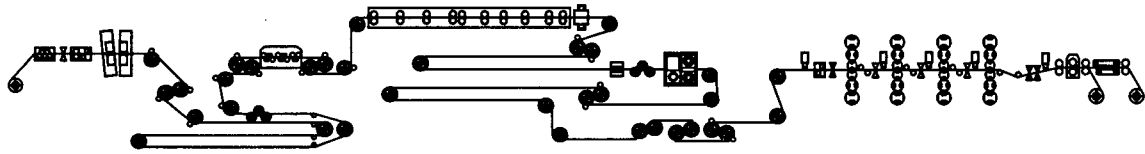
Layout of PCM(Pickling and tandem cold rolling mill)
